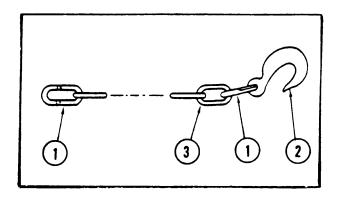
Trailer Safety Chain and Hook Assembly (ARMY)
